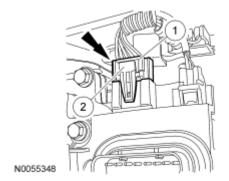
Pressing Tab & Disconnecting Connector Courtesy of FORD MOTOR CO.
